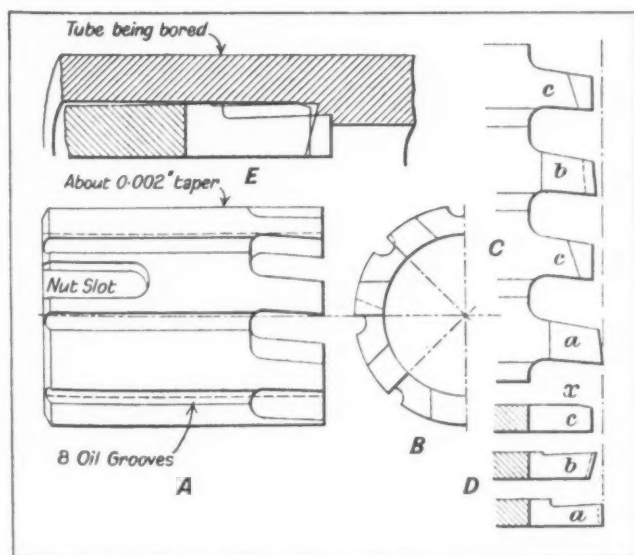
Shell Cutter and Reamer that can be Used in Place of Tool Shown in Fig. 3
